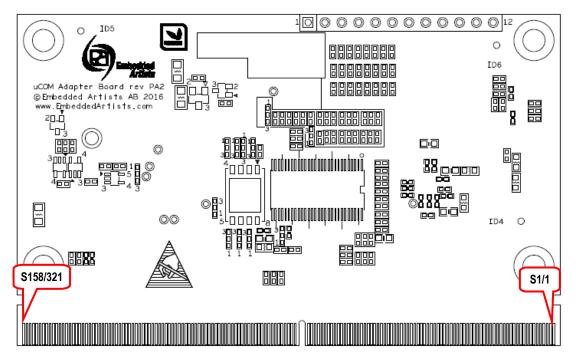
uCOM Adapter Board Pin Numbering, Bottom Side
